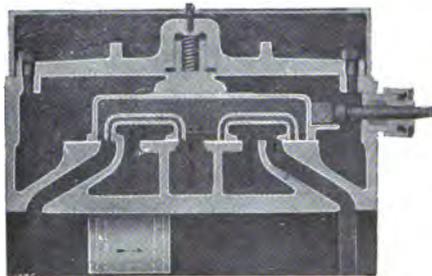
"RUSSELL" ENGINE—PART SECTIONAL PLAN THROUGH CYLINDER AND STEAM CHEST.
